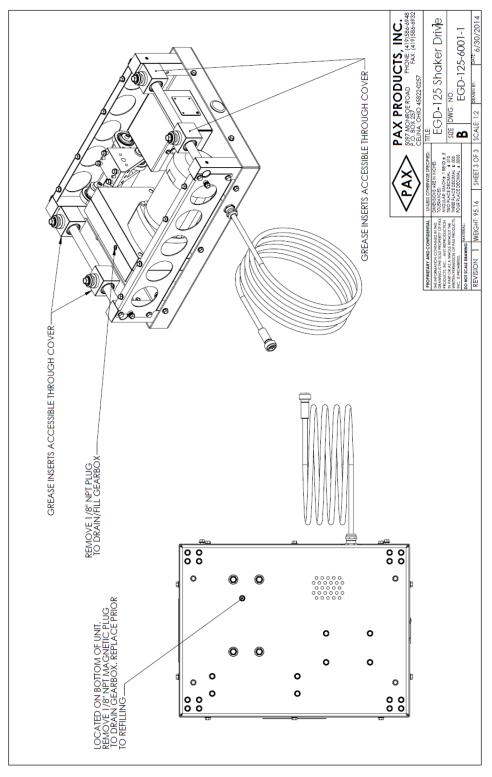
INSTRUCTIONS FOR LUBRICATING THE LINEAR BEARINGS
